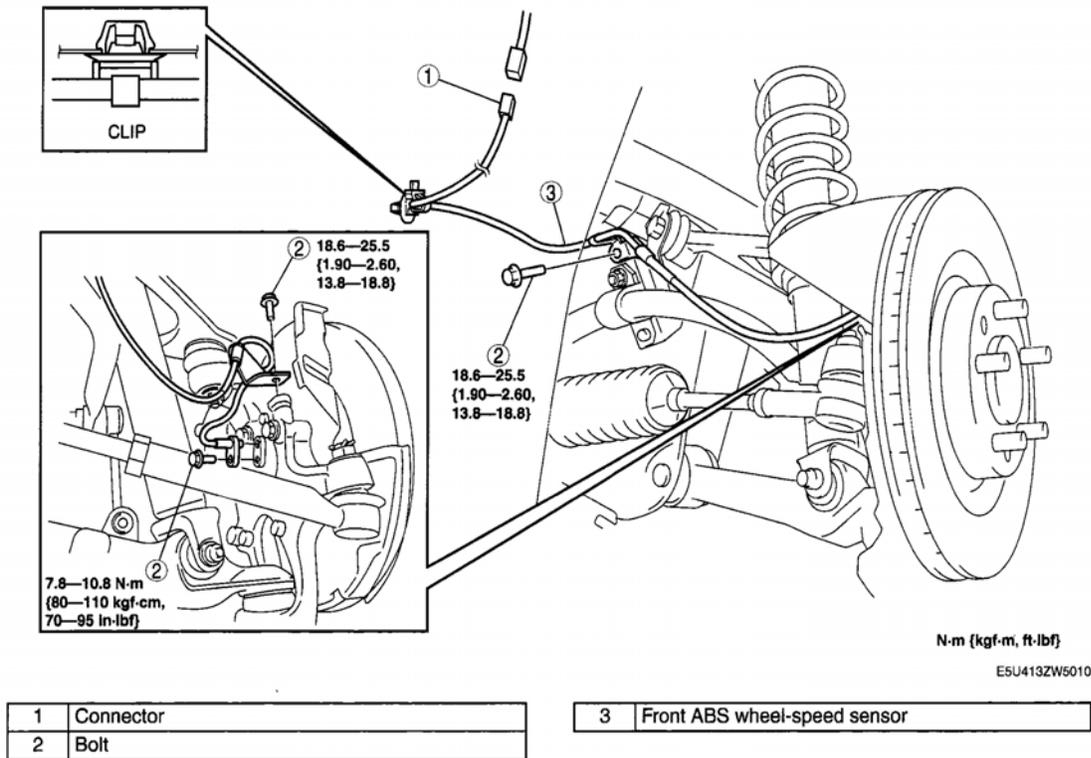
Identifying Front ABS Wheel-Speed Sensor (With Torque Specifications)
